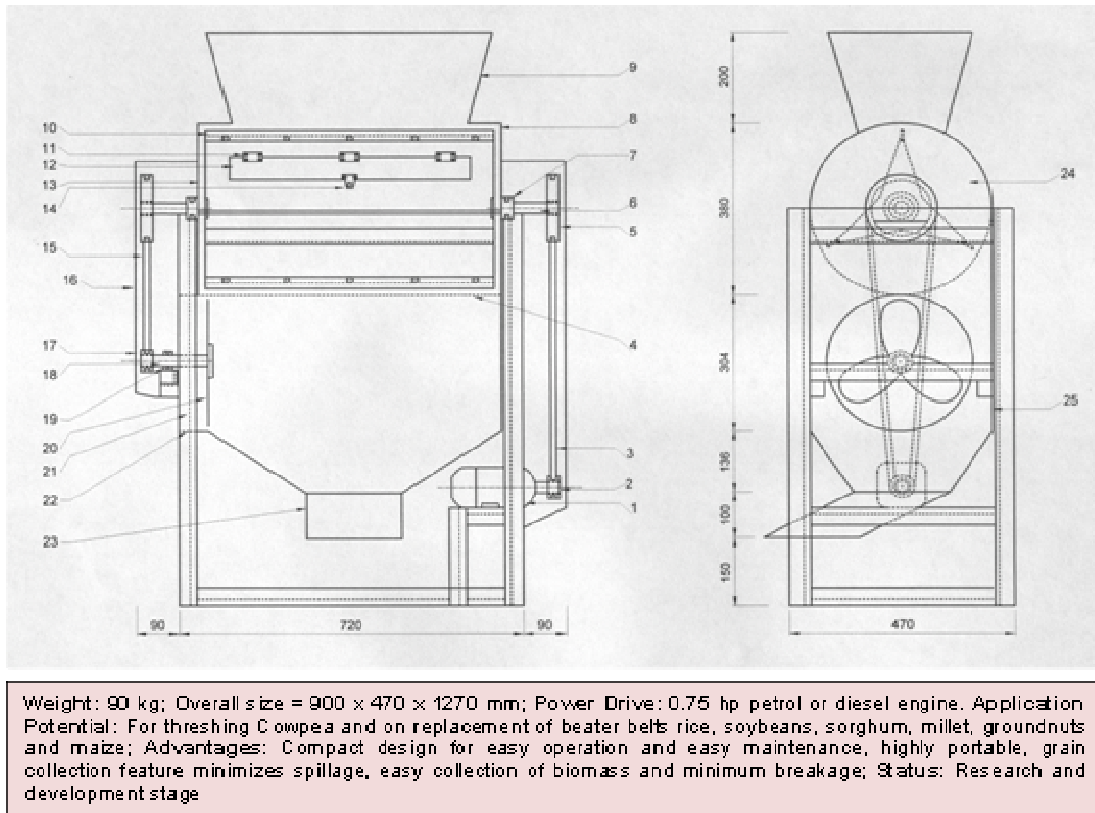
Design drawing of the motorized cowpea thresher (Dimensions in mm). (1) $\frac{3}{4}$ hp motor, (2) 50 mm motor and fan pulley, speed = 1,400 rpm, (3) B60 v-belt 16 mm x 1562 mm, (4) screen, (5) 140 mm beater pulley, speed = 500 rpm, (6) beater shaft, (7) bearing housing, (8) beater upper housing, (9) feed hopper, (10) beater – canvas, (11) discharge gate hinges, (12) discharge gate cover plate, (13) star shaped beater, (14) discharge gate locking unit, (15) B60 v-belt 16 mm x 985 mm, (16) moving parts protective wire mesh, (17) pulley sleeves, (18) fan shaft, (19) 25 mm inside diameter bearing, (20) fan blades, (21) frame system, (22) fan housing, (23) discharge chute, (24) beater upper housing end plates, (25) side cover sheets.
